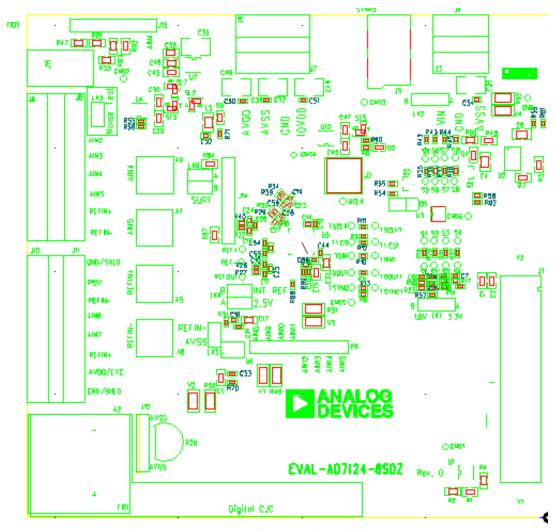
Top Printed Circuit Board (PCB) Silkscreen
